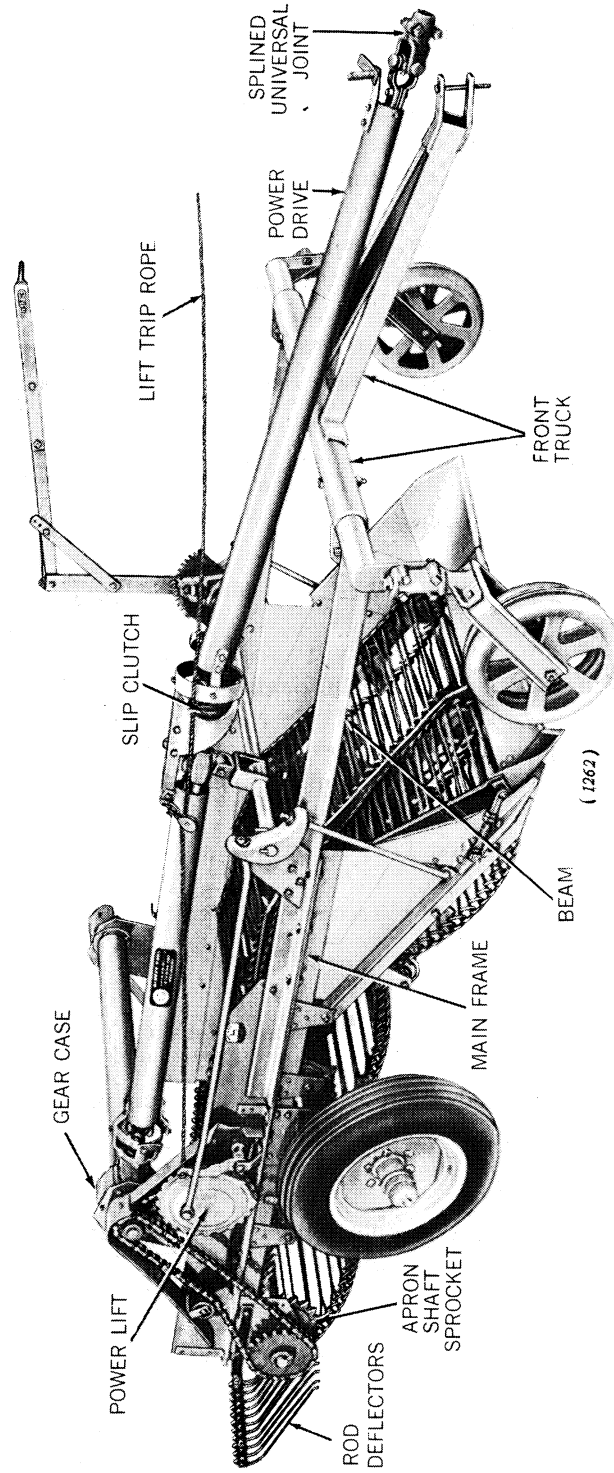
Right-Hand Side of John Deere Double Level-Bed Digger
